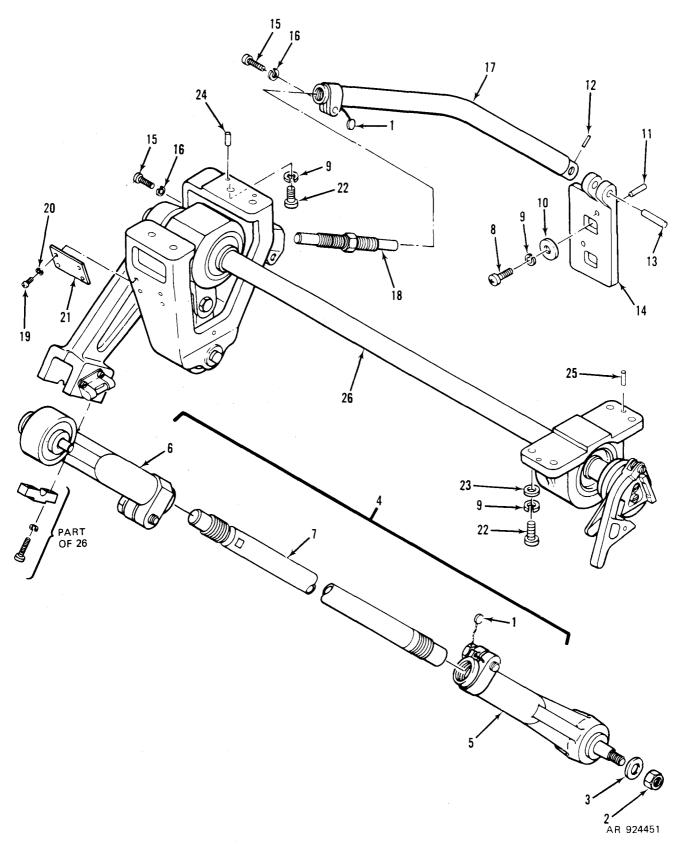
Ballistic drive M15 10516375 including Link assembly 8620208
